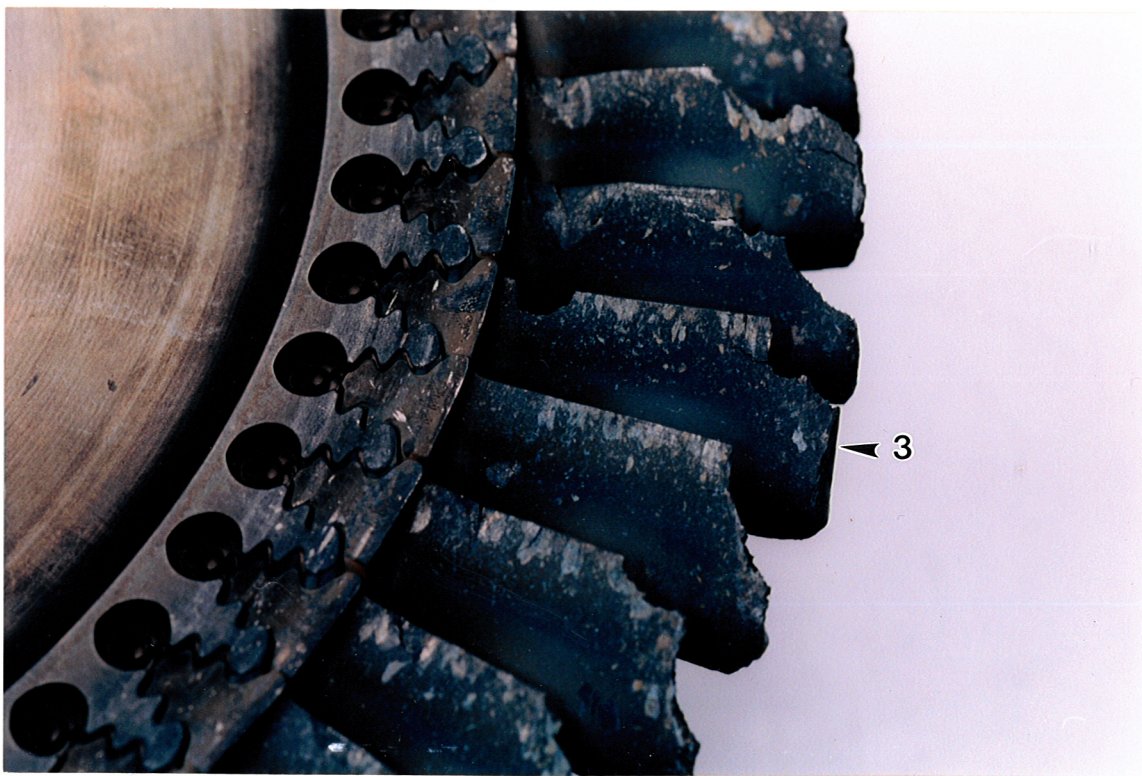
Section of as received turbine wheel showing the most intact blades, including blade #3, indicated. Limited damage with loss of airfoil section both on the tip and blade edges.
